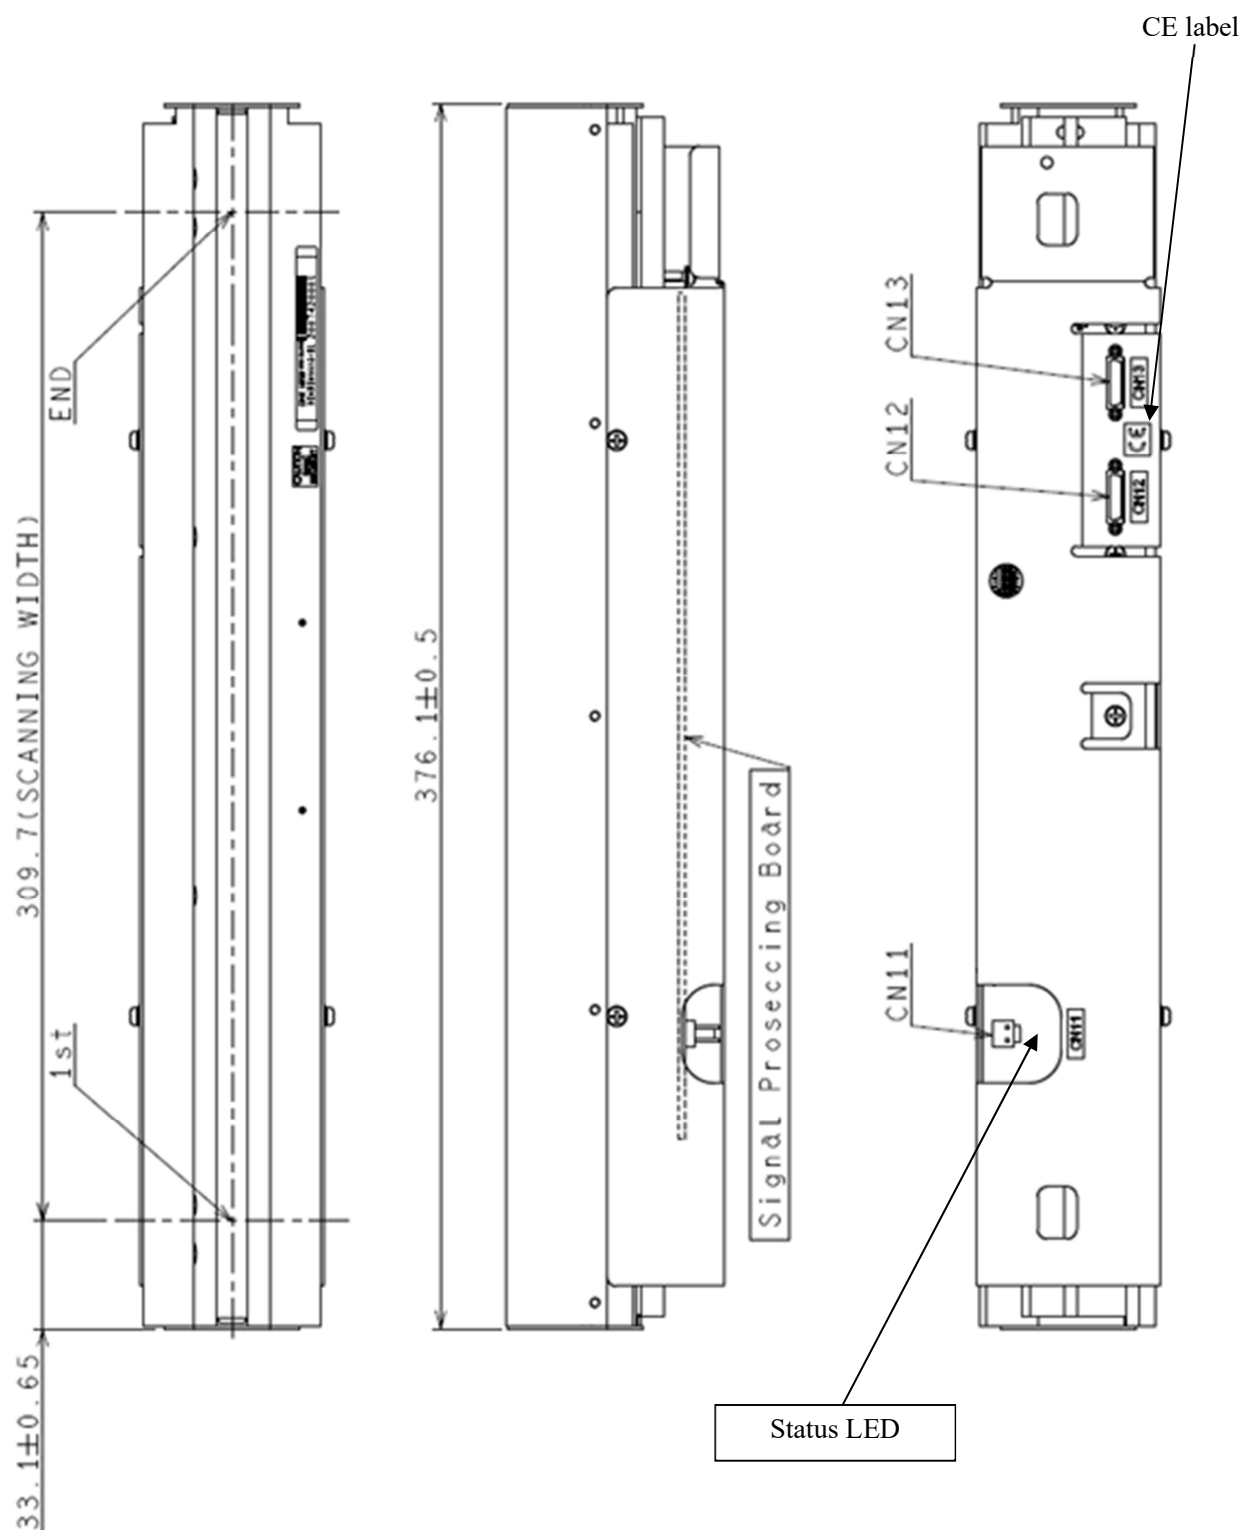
KD6R309AX4-NL Outline drawing (at 24°C)
